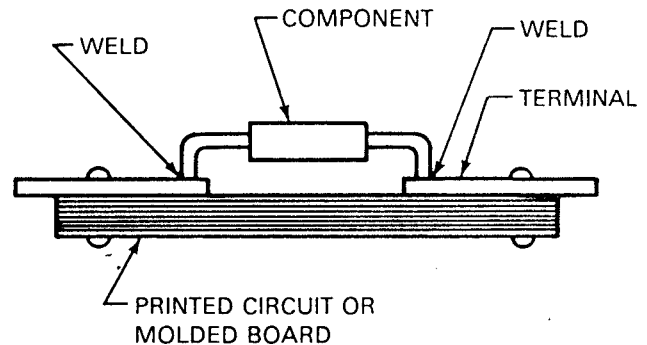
A Typical Percussion Welded Electronic Assembly
